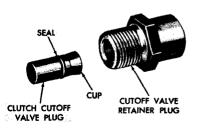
Clutch cutoff valve plug and associated components (hydraulic type)—later model
